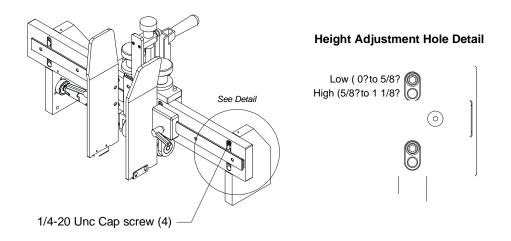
Feeder bridge assembly identifying the location of the four bridge mounting screws and the hole settings for a low and high height adjustment range.
